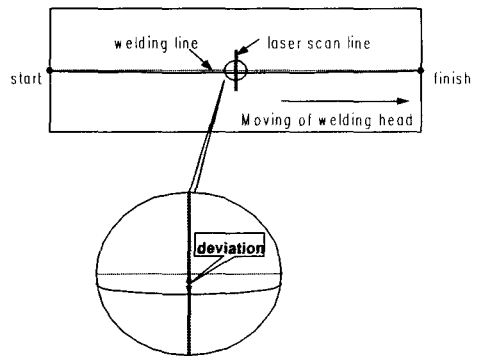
Error and deviation in longitudinal welding line of tube
